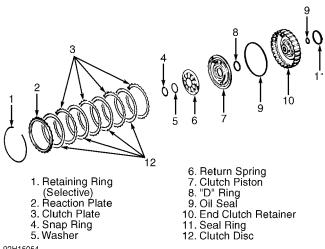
Exploded View of End Clutch Courtesy of Mitsubishi Motor Sales of America.
